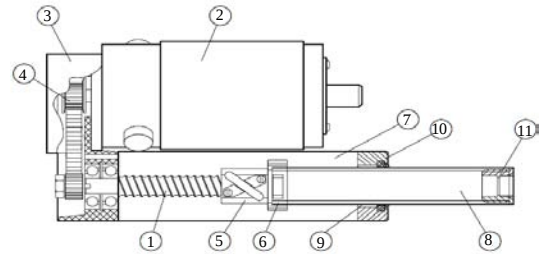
Coaxial telescopic linear actuators data sheet: 1-Ballscrew; 2-Motor; 3-Bearing housing; 4-Drive train; 5-Ball nut; 6-Guide flange; 7-Guide cylinder; 8-Thrust tube; 9-Sleeve bearing; 10-Rod end housing and 11-Rod end
